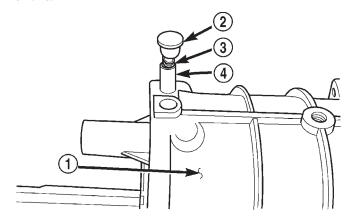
Installing Shift Shaft Bushing Lock Bolt
